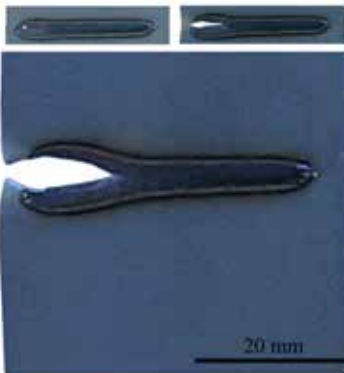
The center crack in the welding at the laser welded specimen. The crack grows in the pre-crack area between the two parts.
